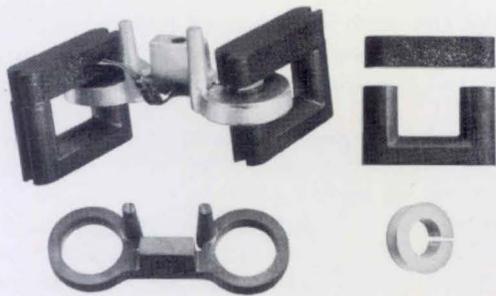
Components and assembly of production-model design of 10:1 ratio transformer.
